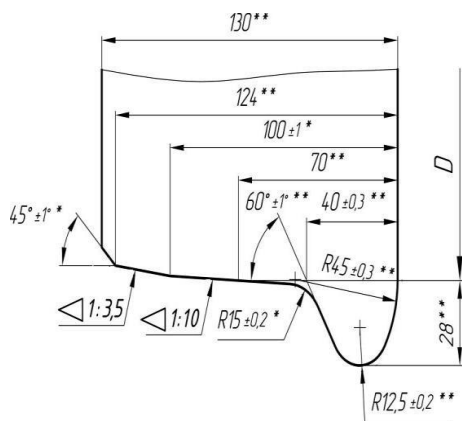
Design and basic dimensions of rolled wheels with curvilinear rim
